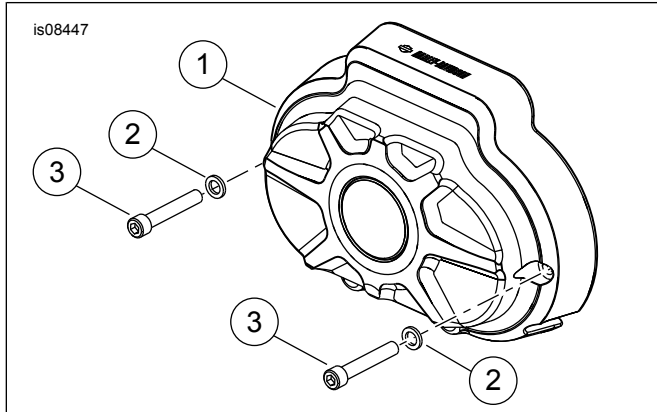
Burst Transmission Side Cover (for kit 34800026)
